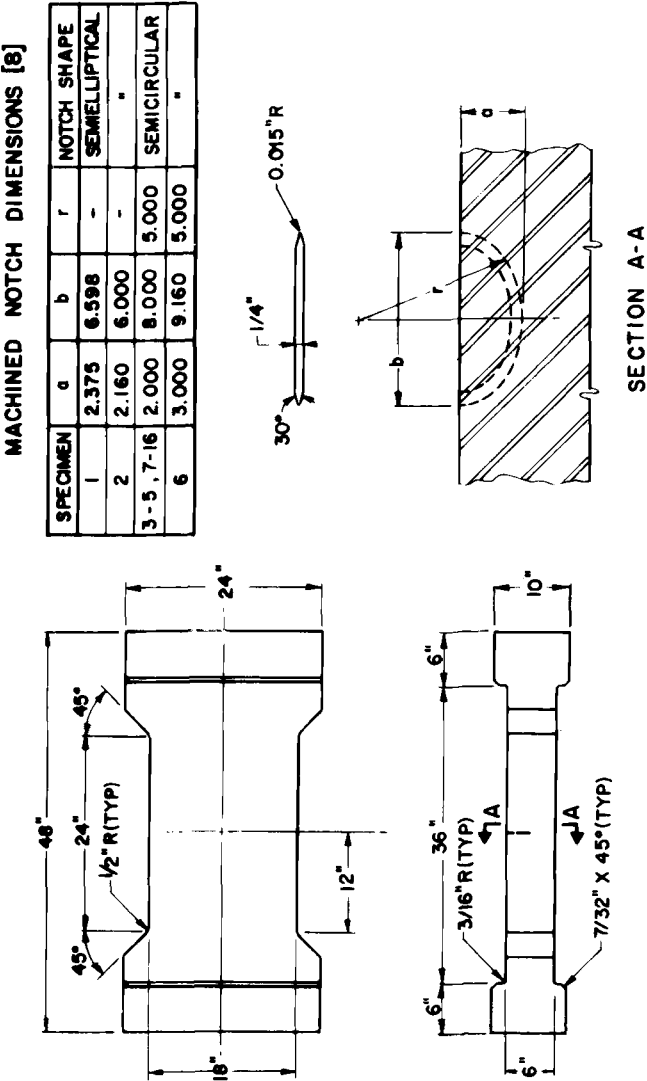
Dimensions of SWRI large tension specimens [8] (1 in. = 2.54 cm).
